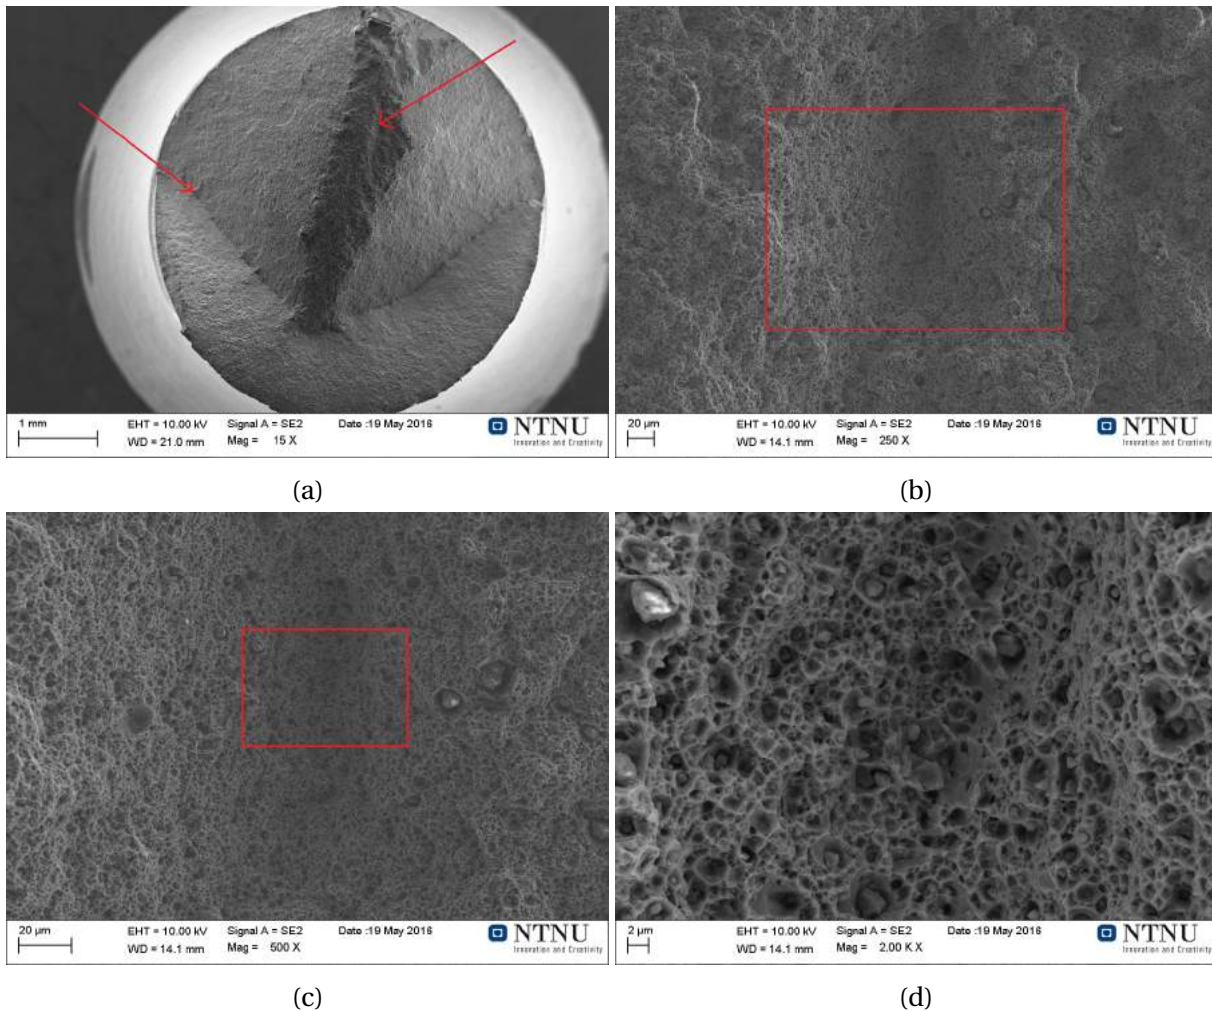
Fracture surface of Al-5%Mg screw extruded machined granulates.
